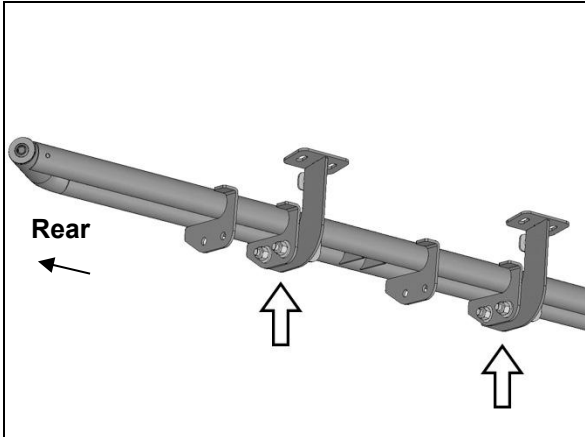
136" wheelbase models, attach left/right Rear Brackets to front facing side of 3B and 4B mounting tabs on driver/left Running Board
